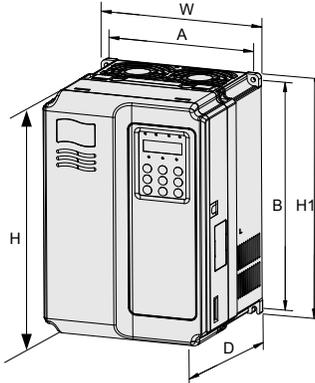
Mounting dimensions of IS300(*)035-C to IS300(*)720-C
